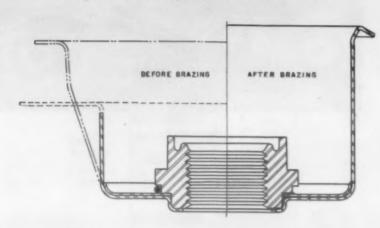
Here is how the components and brazing metal shown in Fig. 2 are assembled and how the copper penetrates uniformly throughout all the joints (right).
